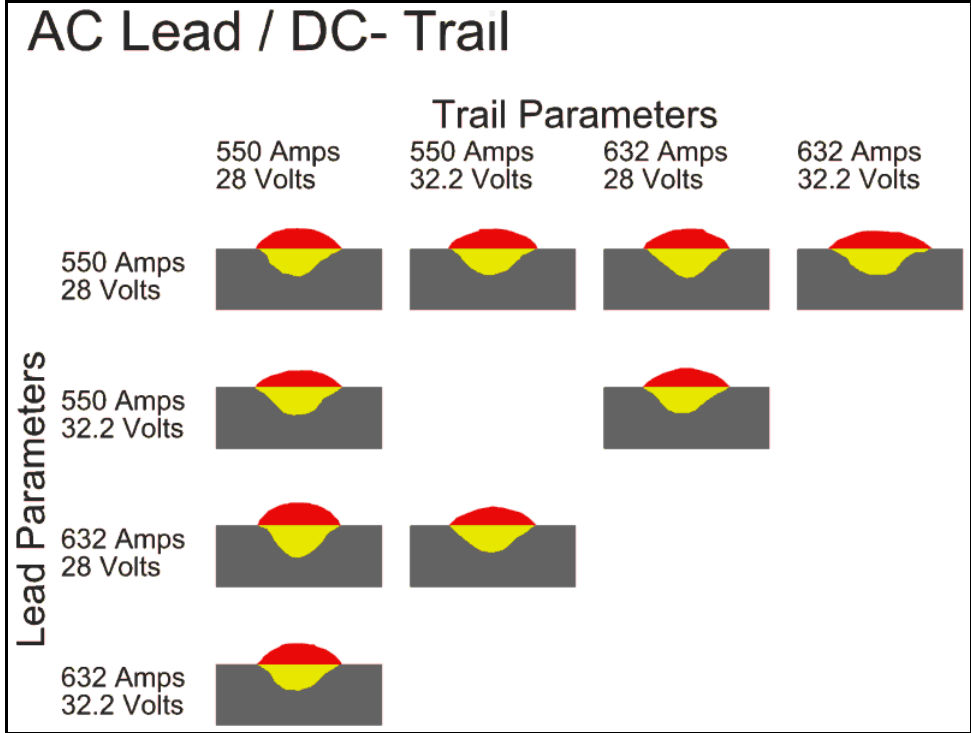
Group 2 AC-SQ Lead, DCEN Trail Tandem Weld Bead Cross-Sections
